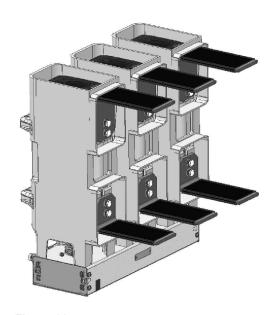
Details of ISM15_HD_1 terminals connection to single rectangular cross-shaped busbars (at fixed installation, for example)
